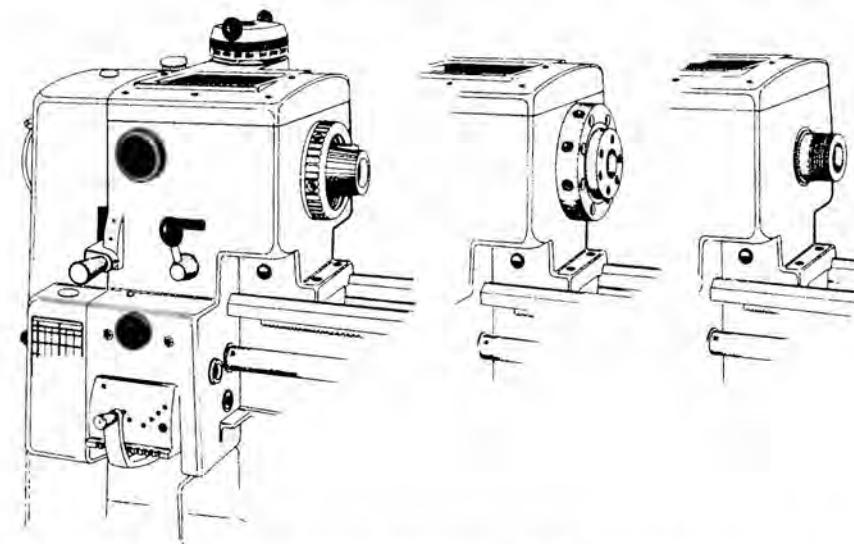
(Left) Long taper type spindle nose. (Center) Cam-lock type spindle nose. (Right) Threaded spindle nose.
